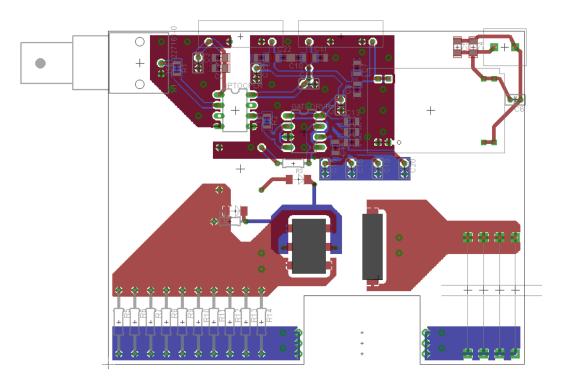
Experimental Circuit Printed Circuit Board Layout. Board dimensions are  $3.125^{\circ} \times 4^{\circ}$ .
